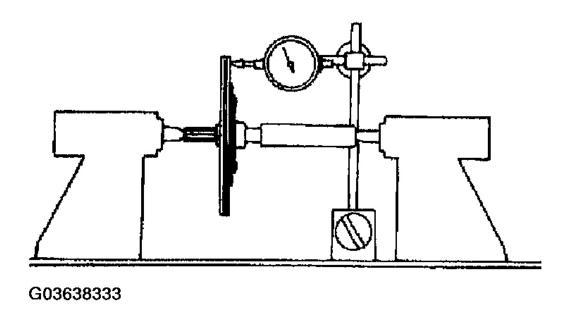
Measuring Clutch Disc Runout Using A Dial Indicator Courtesy of MAZDA MOTORS CORP.
